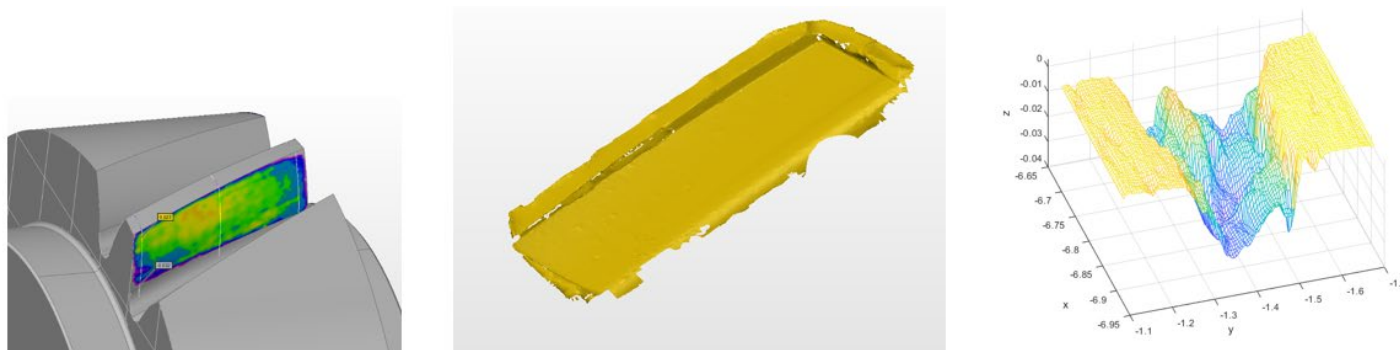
Characterising damage in example demonstrator gears. (L to R Hexagon Romer Arm laser scanner measurement results fitted to the nominal gear geometry, portable laser scanner measurement on a flexible replica surface, Alicona optical measurement evaluation on a soft replica).
